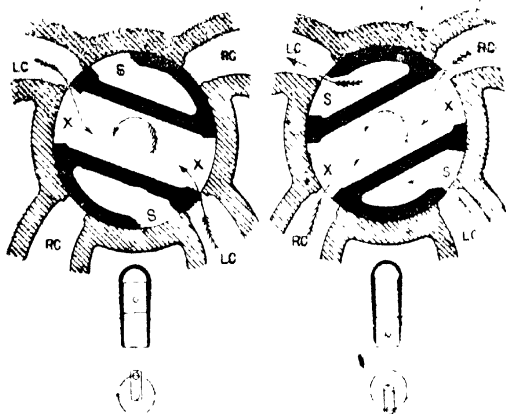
Section showing Butler combined admission and exhaust valve arranged for two cylinders.
